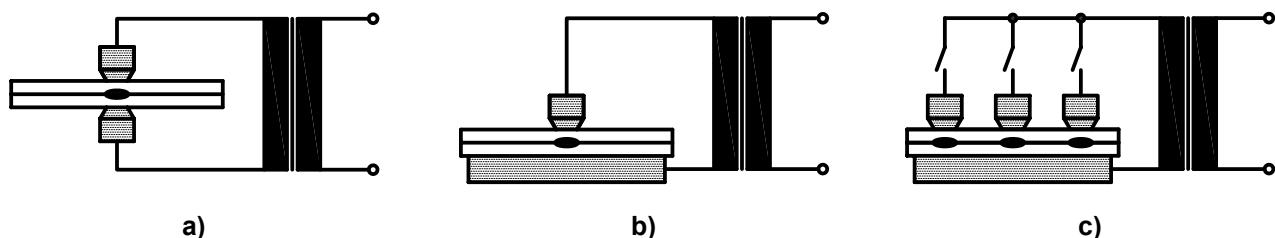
Typical arrangements for single spot welds — Direct welding
